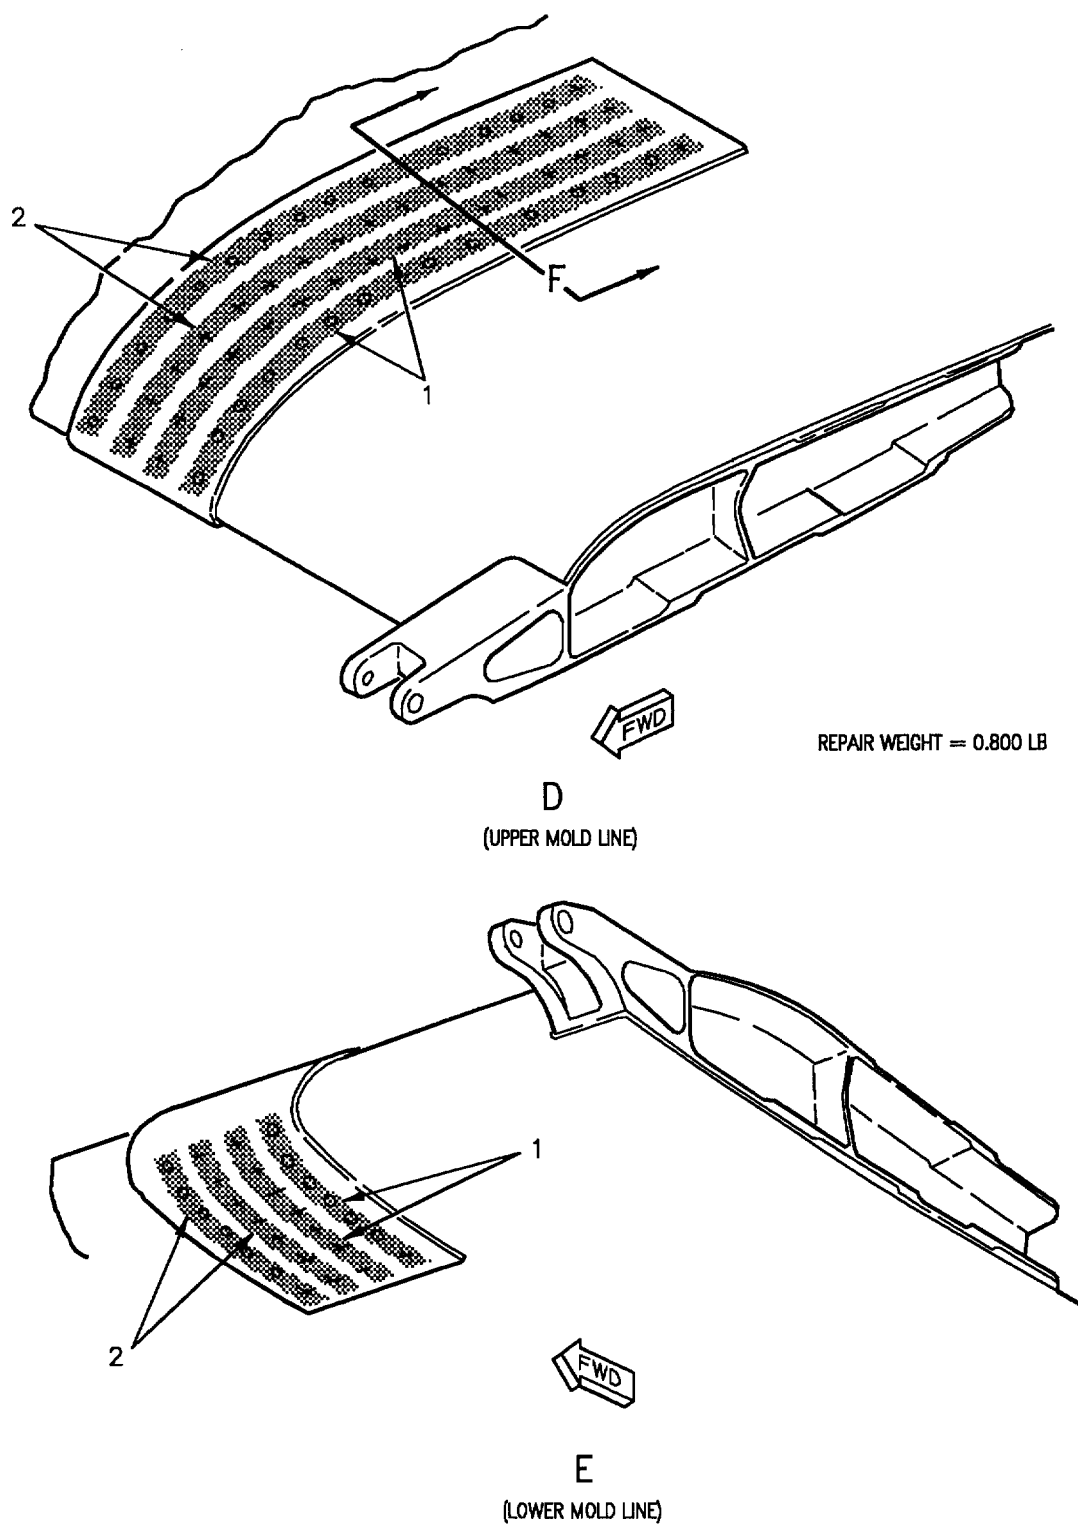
Outboard Edge Damage Repair (Sheet 3)
